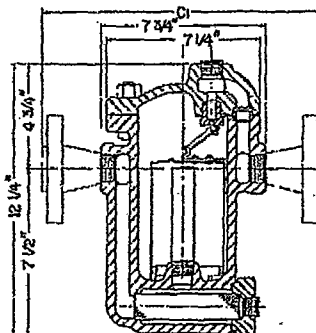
Dimensions, No. 983 trap. Dotted lines show flanges welded to body.
